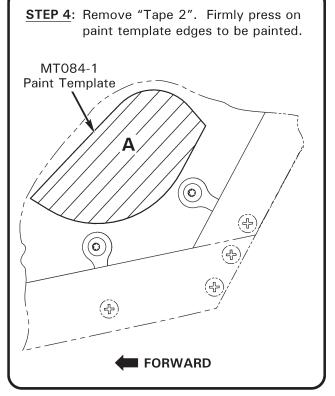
PAINT TEMPLATE LAYOUT PROCESS
